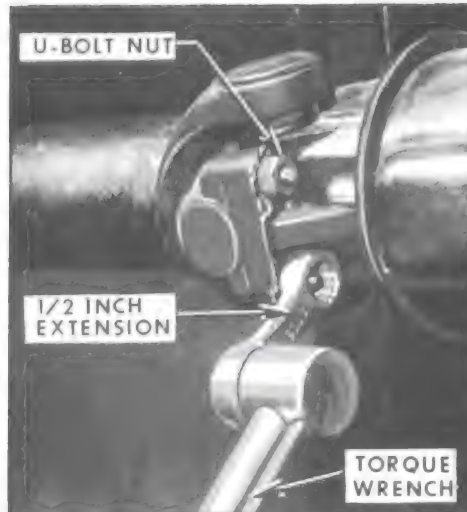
Using Extension to Torque U-Bolt Nuts
